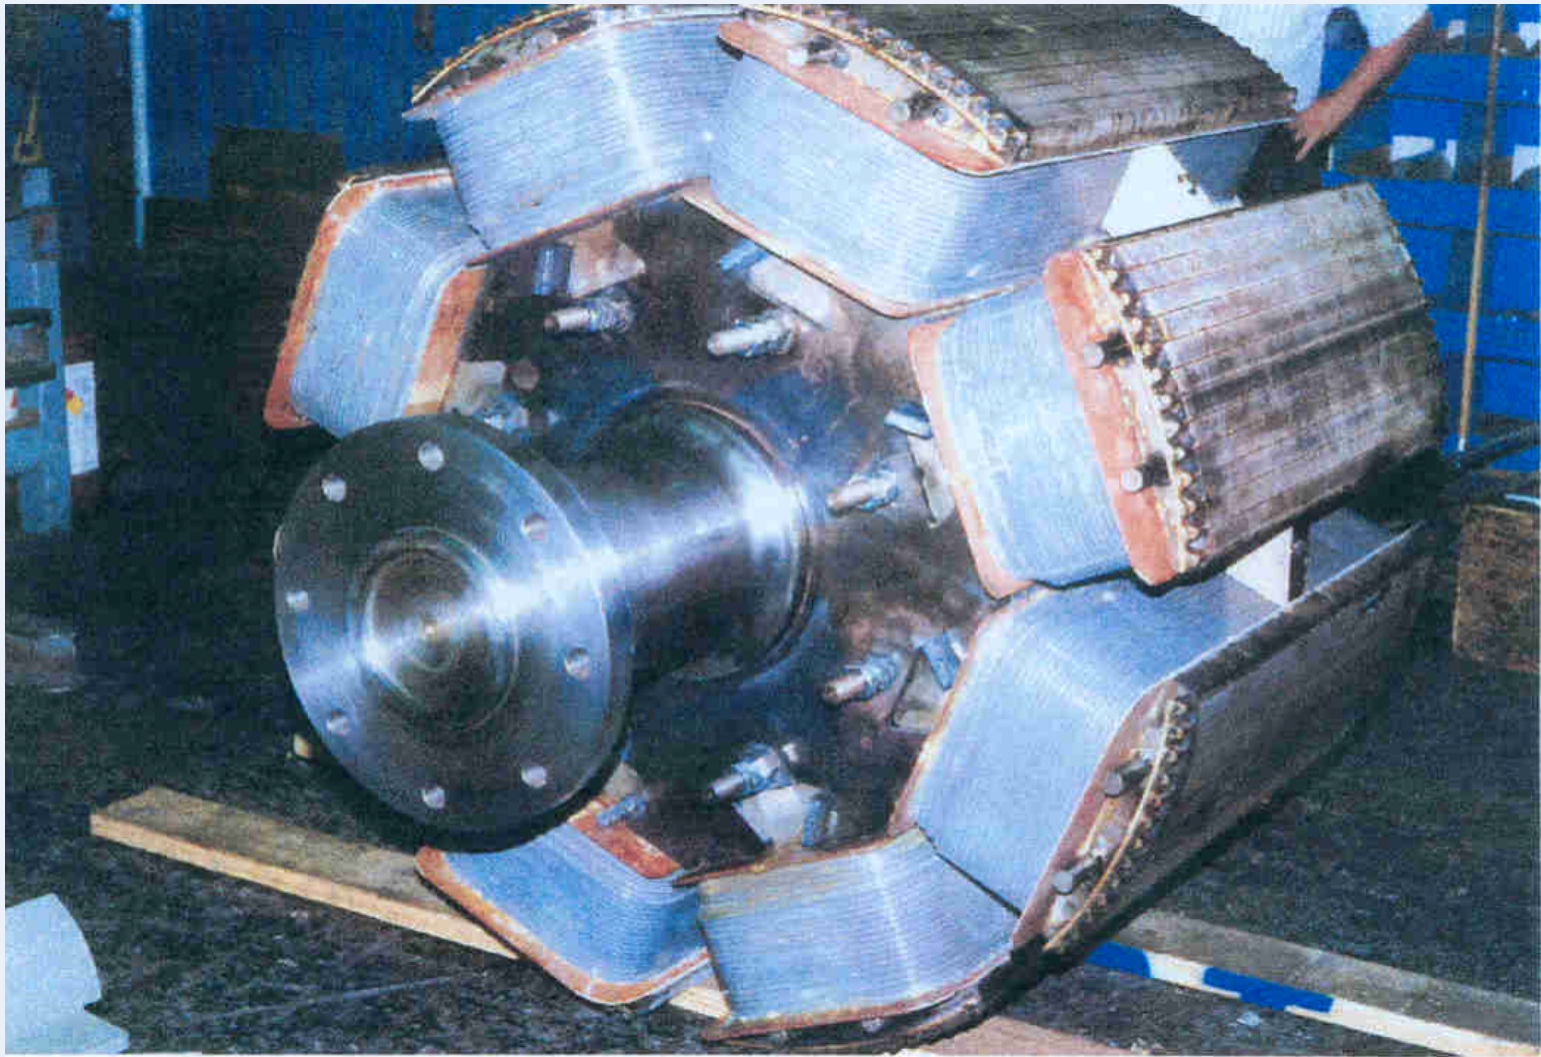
Complete Rotor Assembly -- coupling end of shaft view
